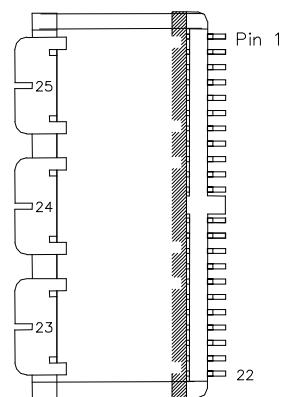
ZM7100 Mechanical Drawing – Bottom View
